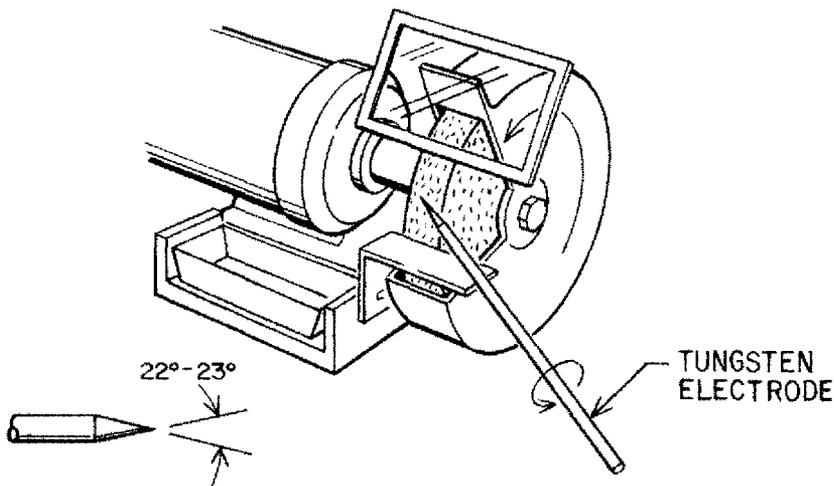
Grinding the thoriated tungsten electrode tip for root bead welding. Point angle specification is shown as 22° to 23°.
